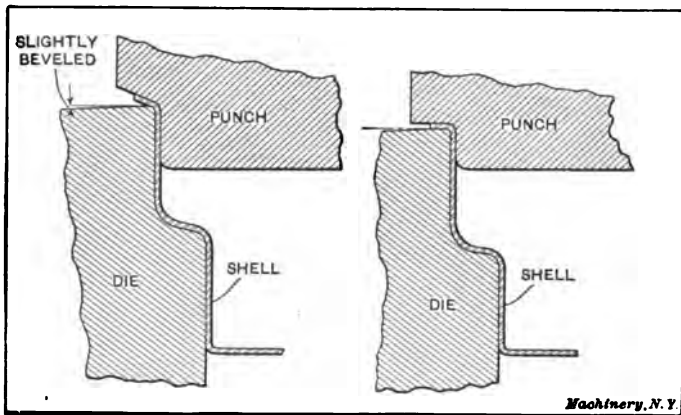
Punch and Die for Starting Fig. 19. Punch and Die for Finishing the Flange
